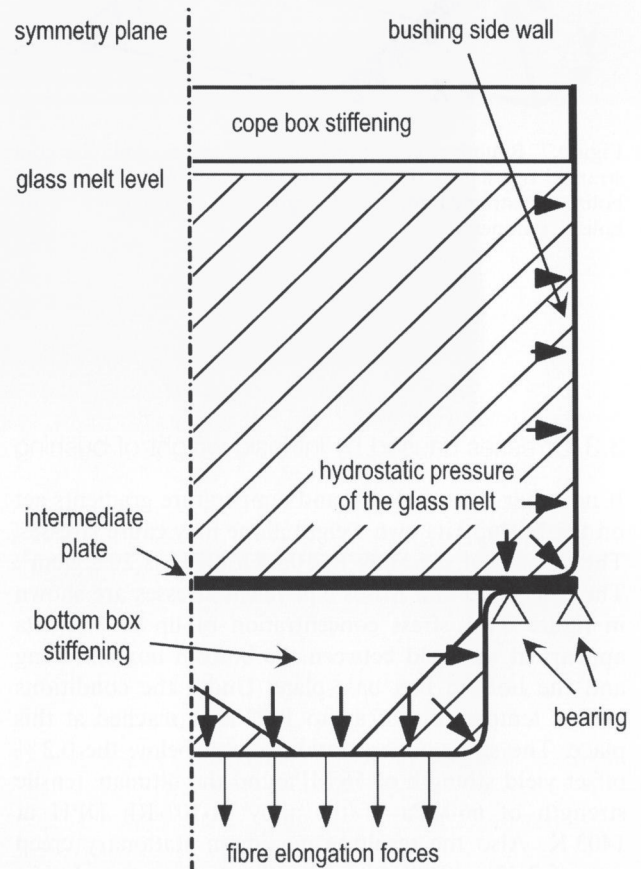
Schematic cross-sectional view of the FEM model of a bushing made of Pt-10% Rh DPH.
